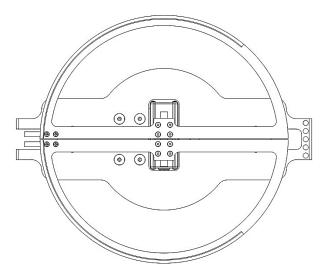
Apogee™ Mechanical Debonder Clamping Mechanism
